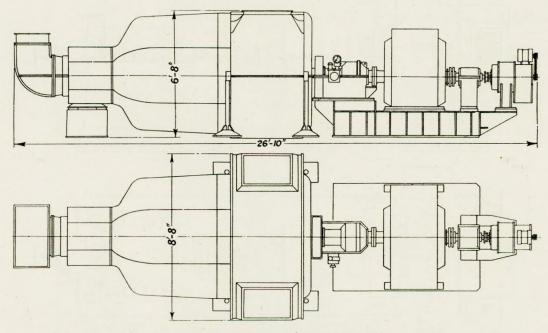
,000 kW. gas turbine alternator with 6,750/1,500 r.p.m. epicyclic gear
